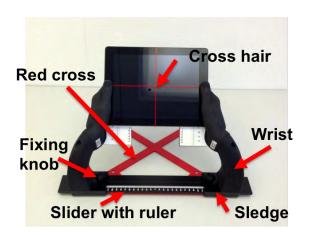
Fixture SHO-FX-HOTV4 parts.
